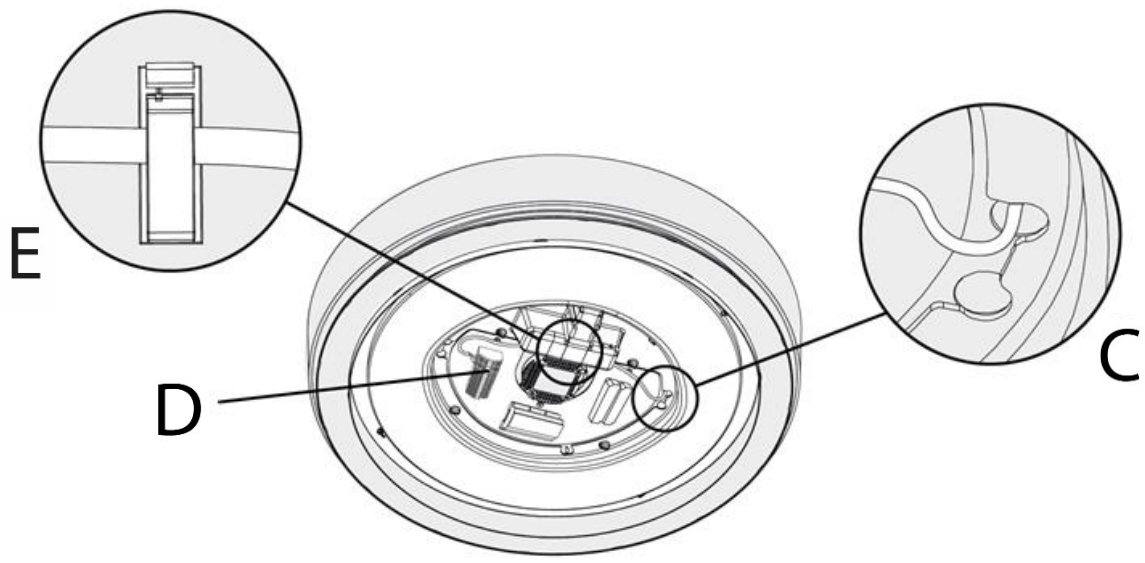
CONNECTION OF ELECTRICAL INSTALALTION
